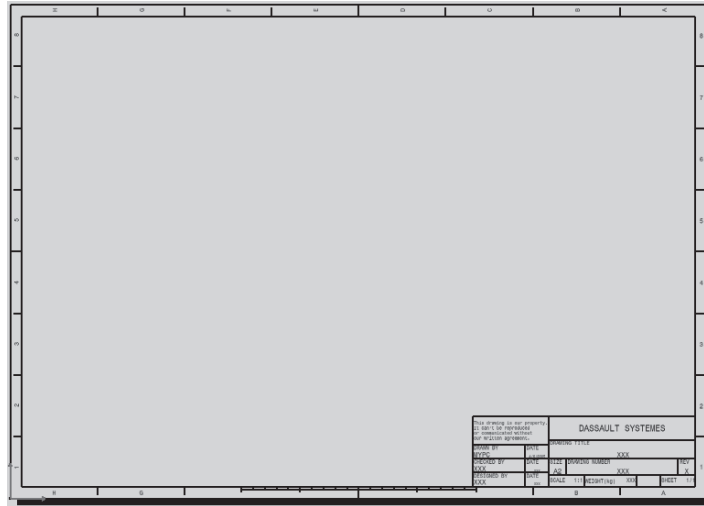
The drawing sheet, after adding the frame and title block to the drawing sheet
